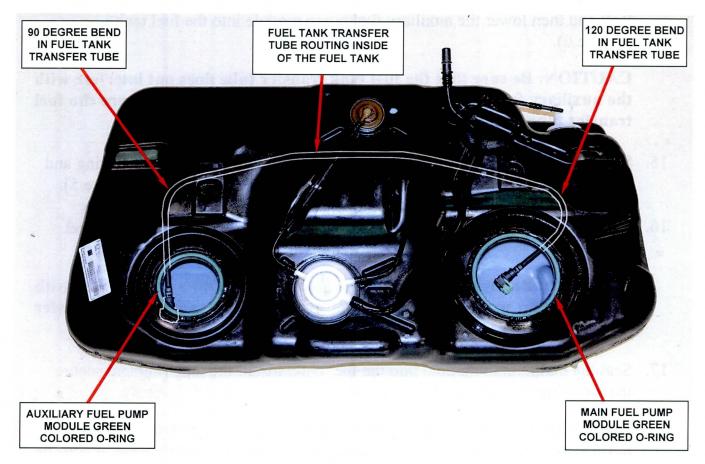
Fuel Tank Transfer Tube Internal Tank Routing and Orientation (fuel tank removed for photographic purposes only)
